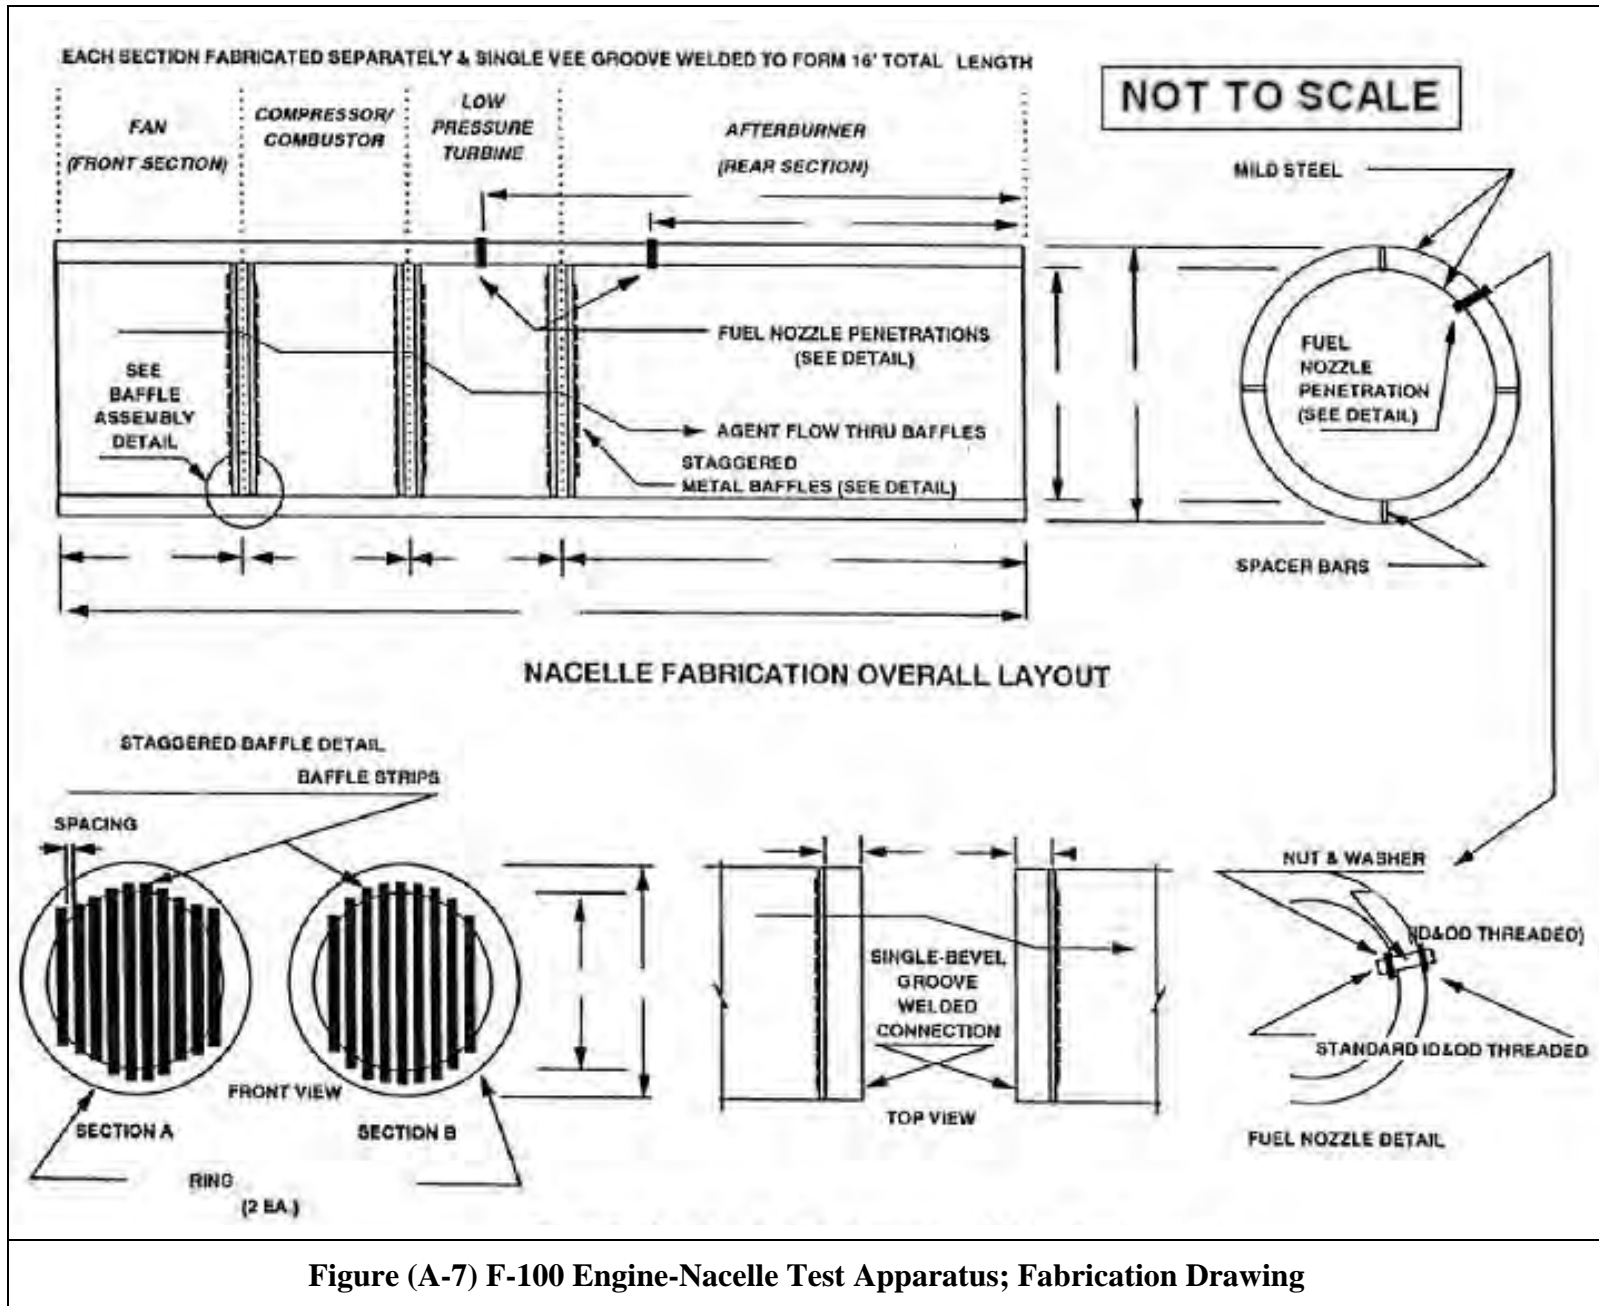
F-100 Engine-Nacelle Test Apparatus; Fabrication Drawing
